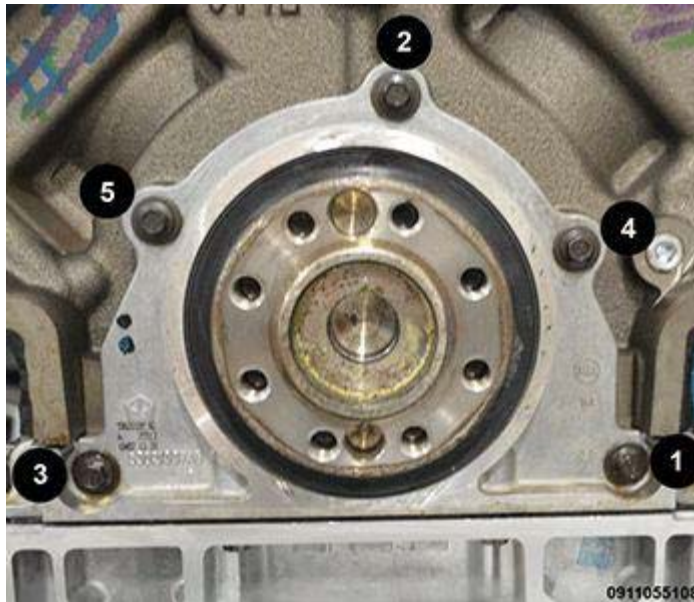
Rear Oil Seal Retainer Mounting Bolts Removal/Installation Sequence
